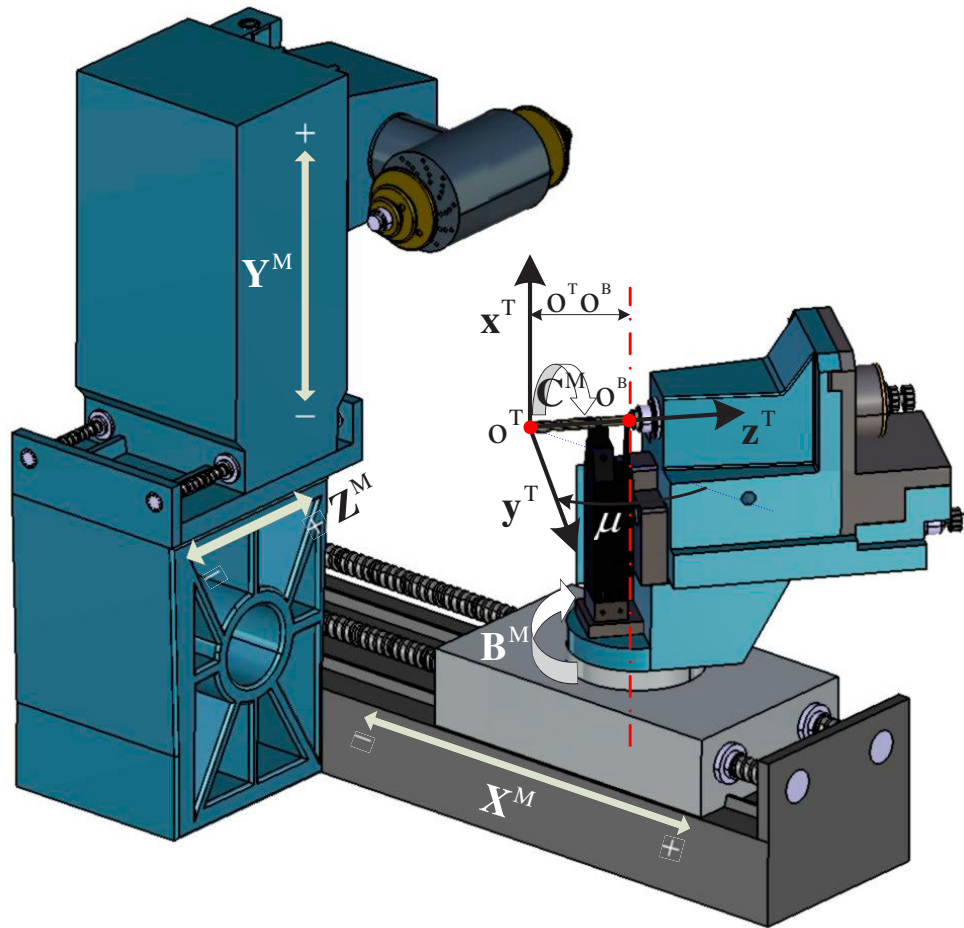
The configuration of a 5-axis CNC grinding machine.
